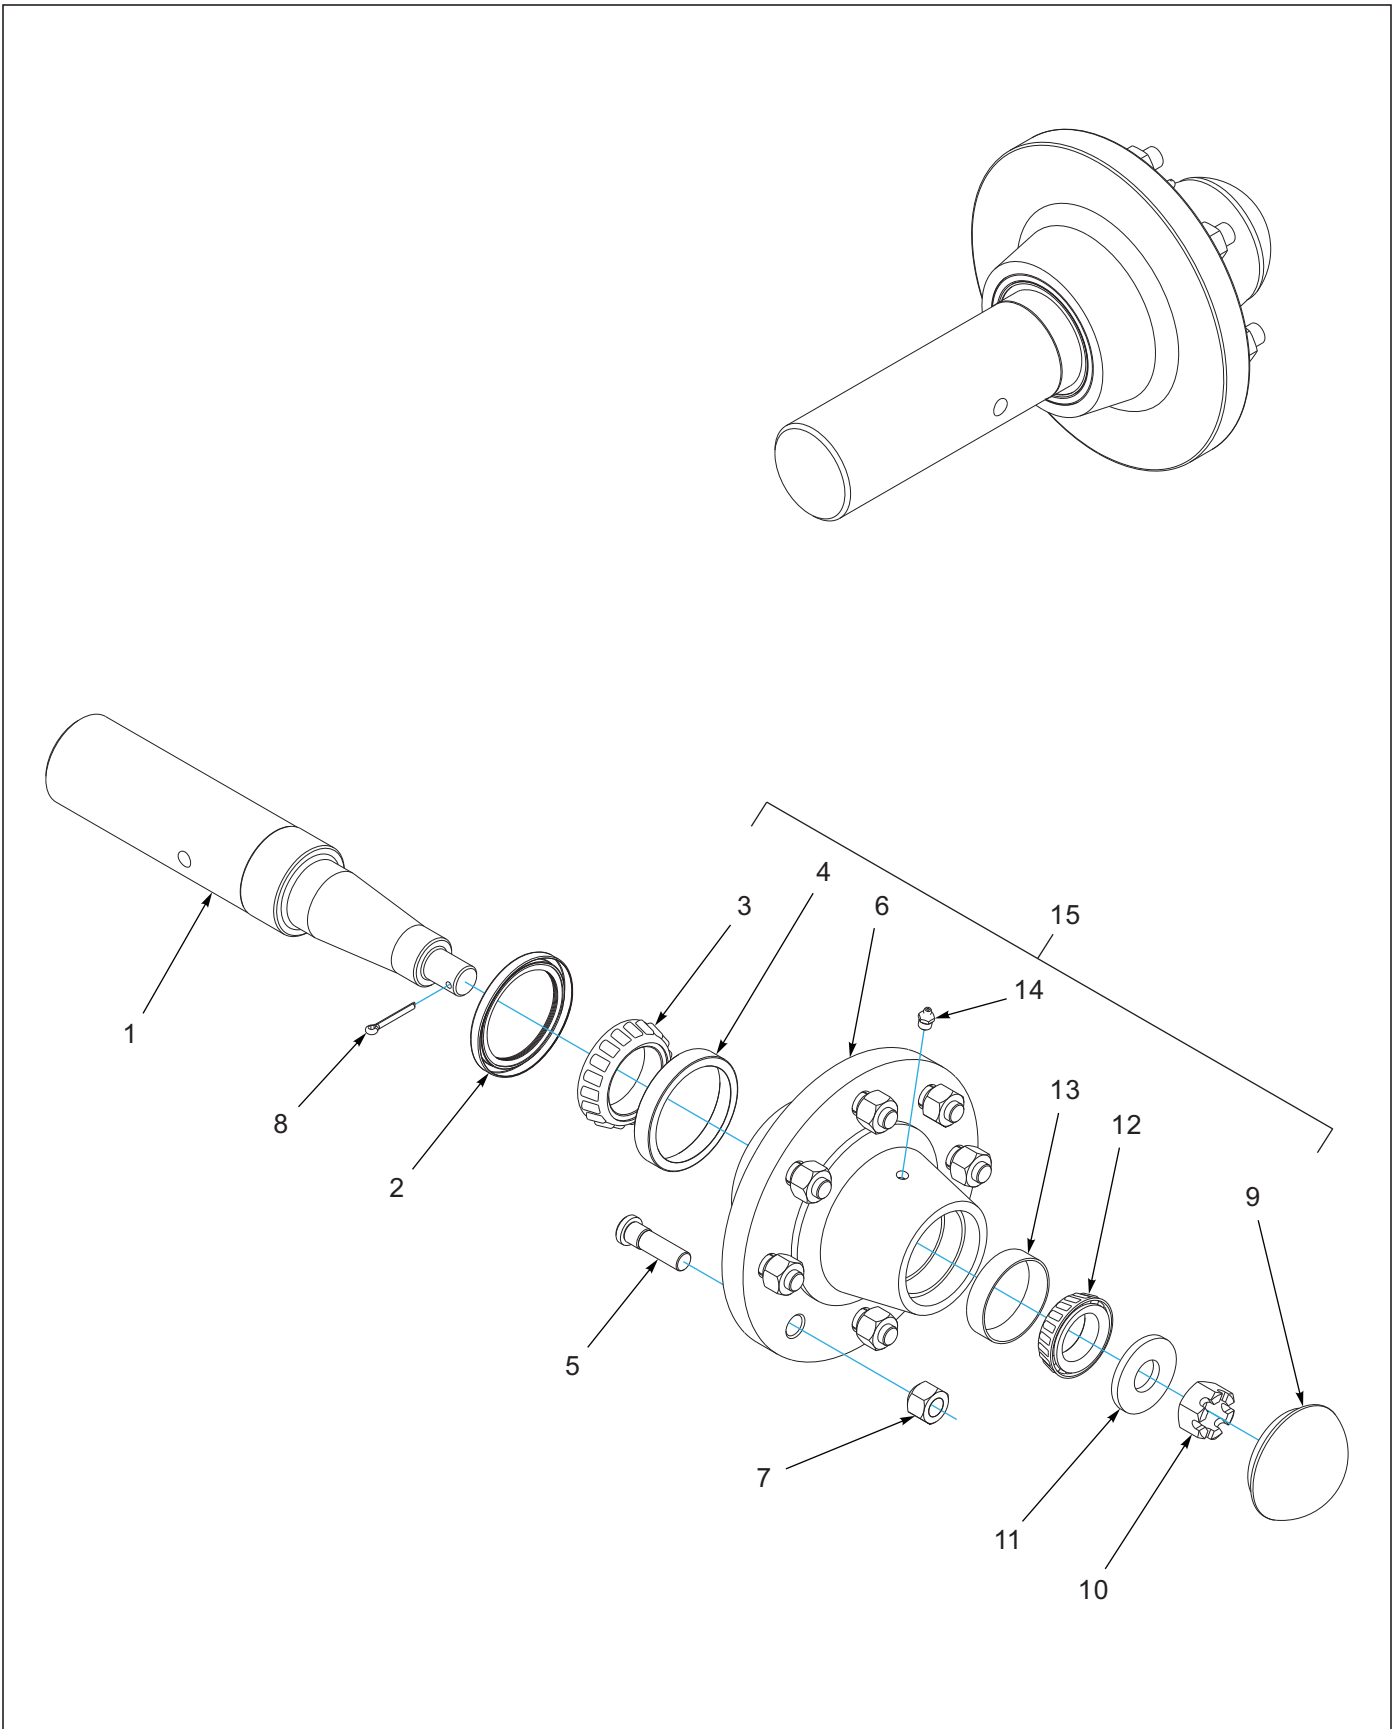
Hub and Spindle Assembly - 8 Bolt
